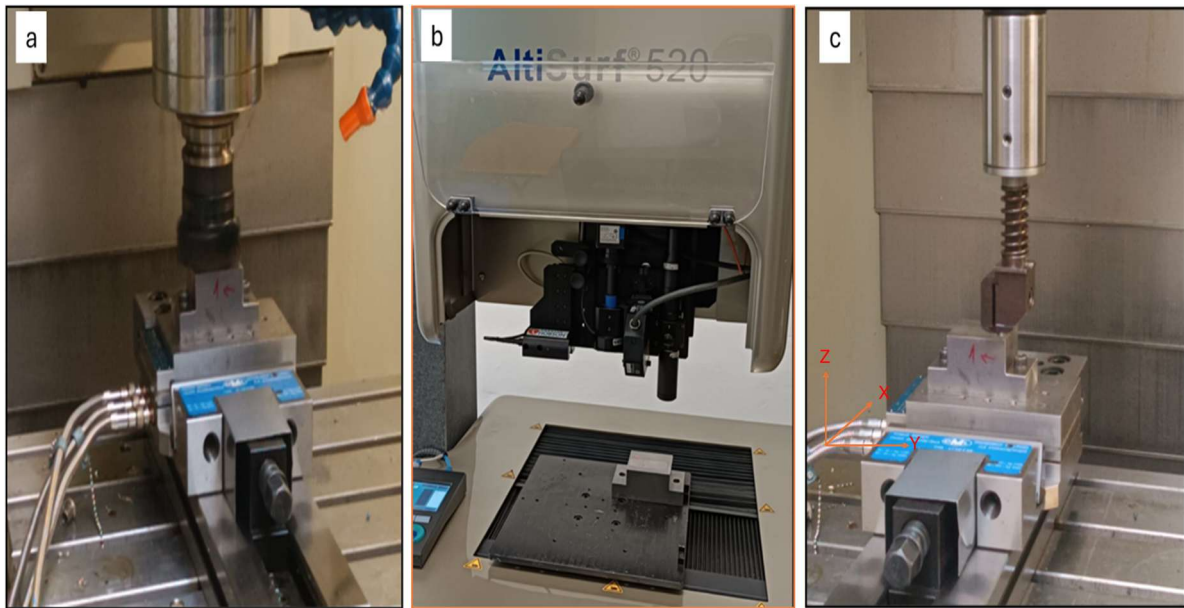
Experimental equipment: (a) face milling, (b) roughness measurement, and (c) burnishing process.
